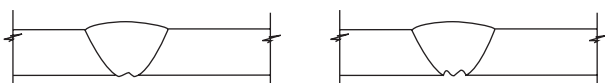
Root Concavity and Shrinkage Grooves
